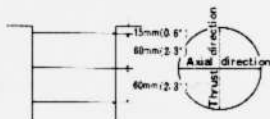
Measuring Points X0313 of Cylinder Bore
